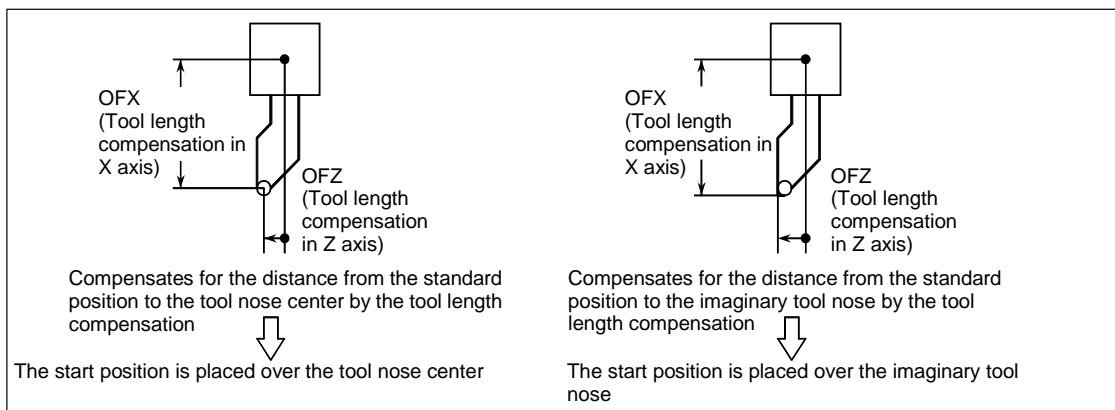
(b) Tool length compensation when the turret center is placed over the start point
